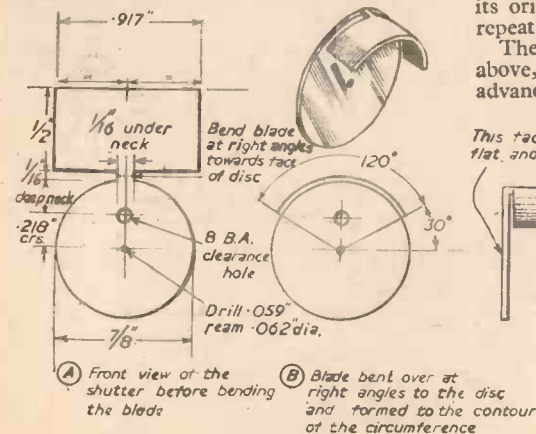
The shutter made from 25 s.w.g. (0.020 in. thick) brass. (A)—Front view of shutter before bending blade. (B)—Blade bent over at right angles to the disc and formed to the contour of the circumference.
